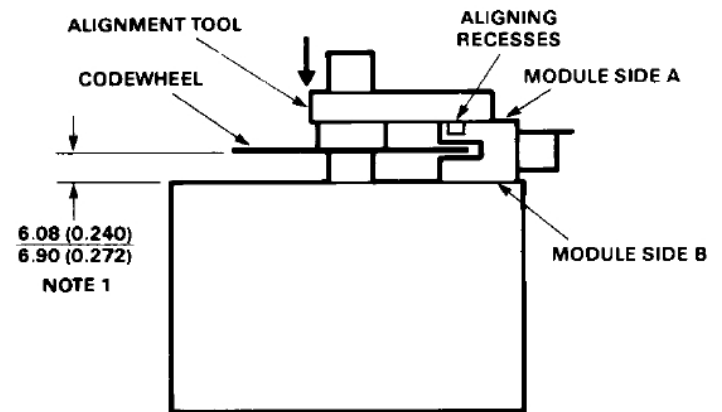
Alignment Tool Is Placed over the Shaft and onto the Code-Wheel Hub. Alignment Tool Pins Mate with the Aligning Recesses on the Module.
